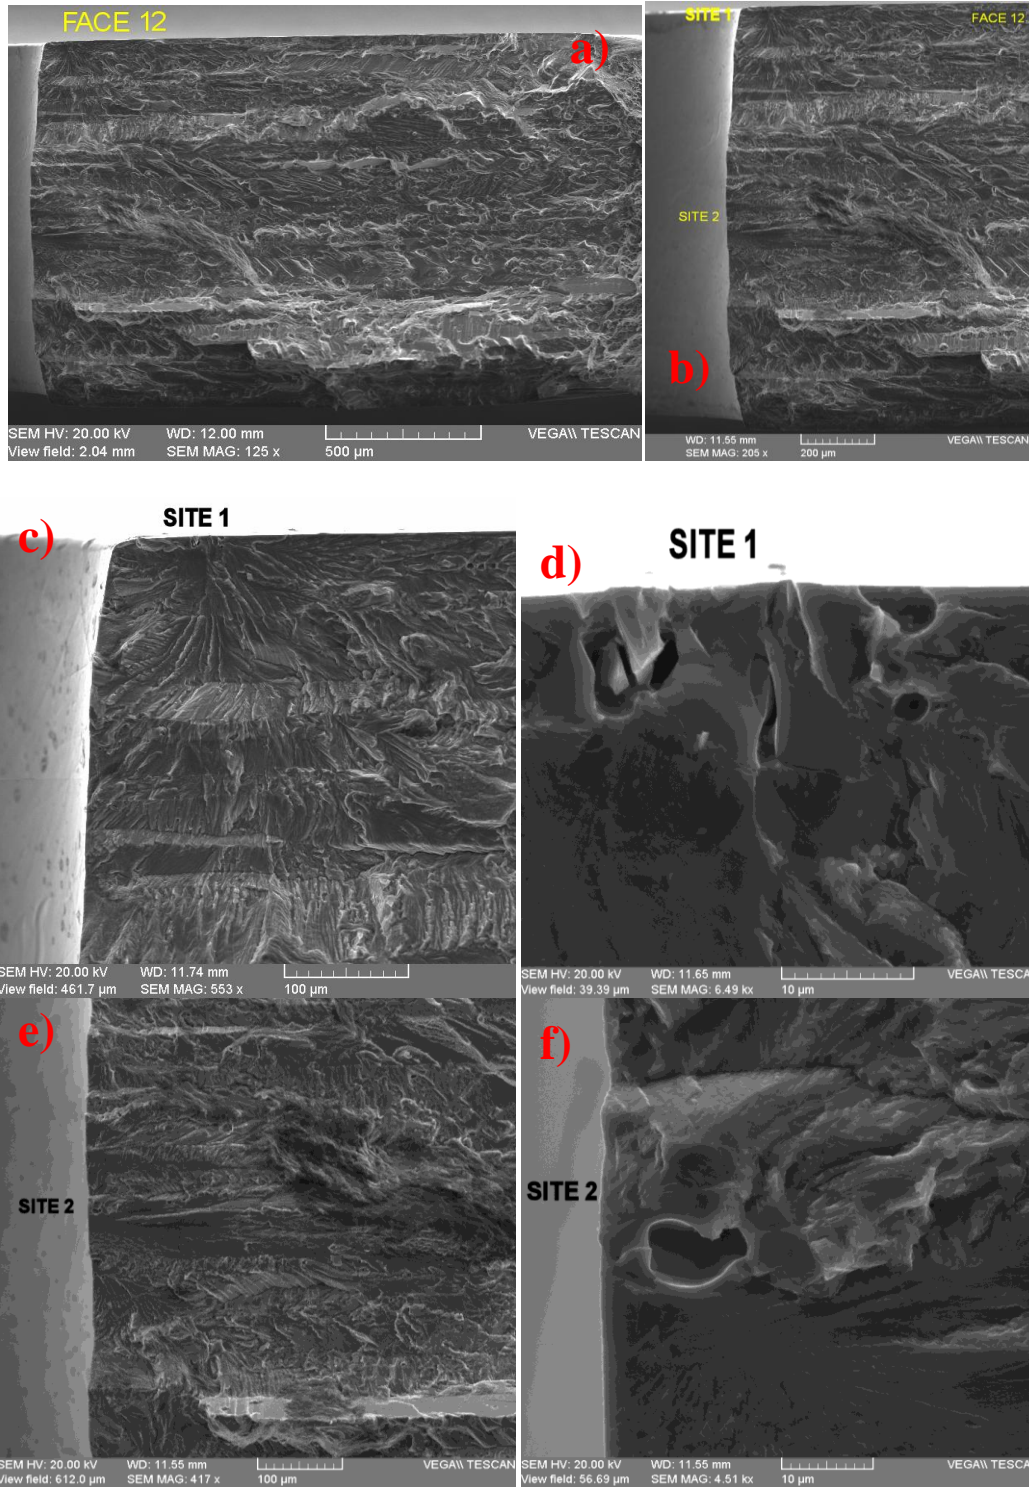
Fracture surface topography and crack initiating particles for sample C-3. Figures a) and b) show surface topography. Figures c), d) and e), f) show crack initiating particles.
